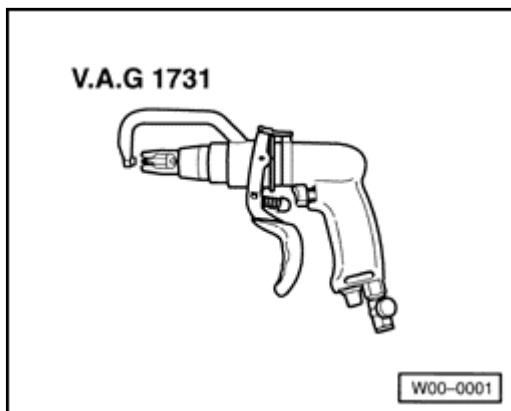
Spot Weld Remover V.A.G 1731
